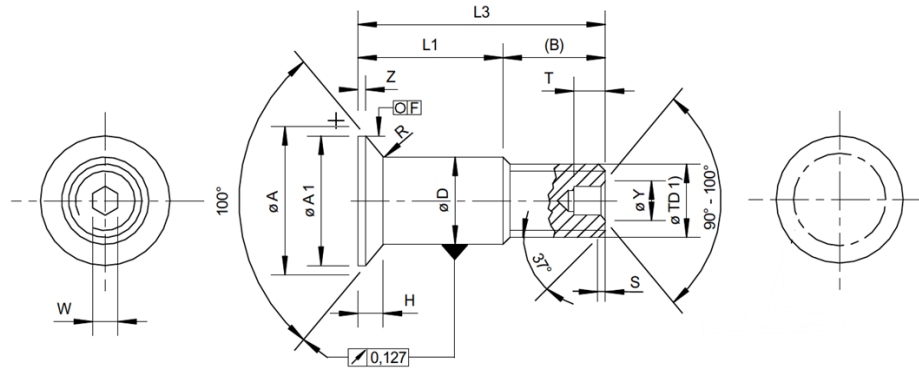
Sketch of HI-LOK™ fastener and definition of all geometric dimensions
